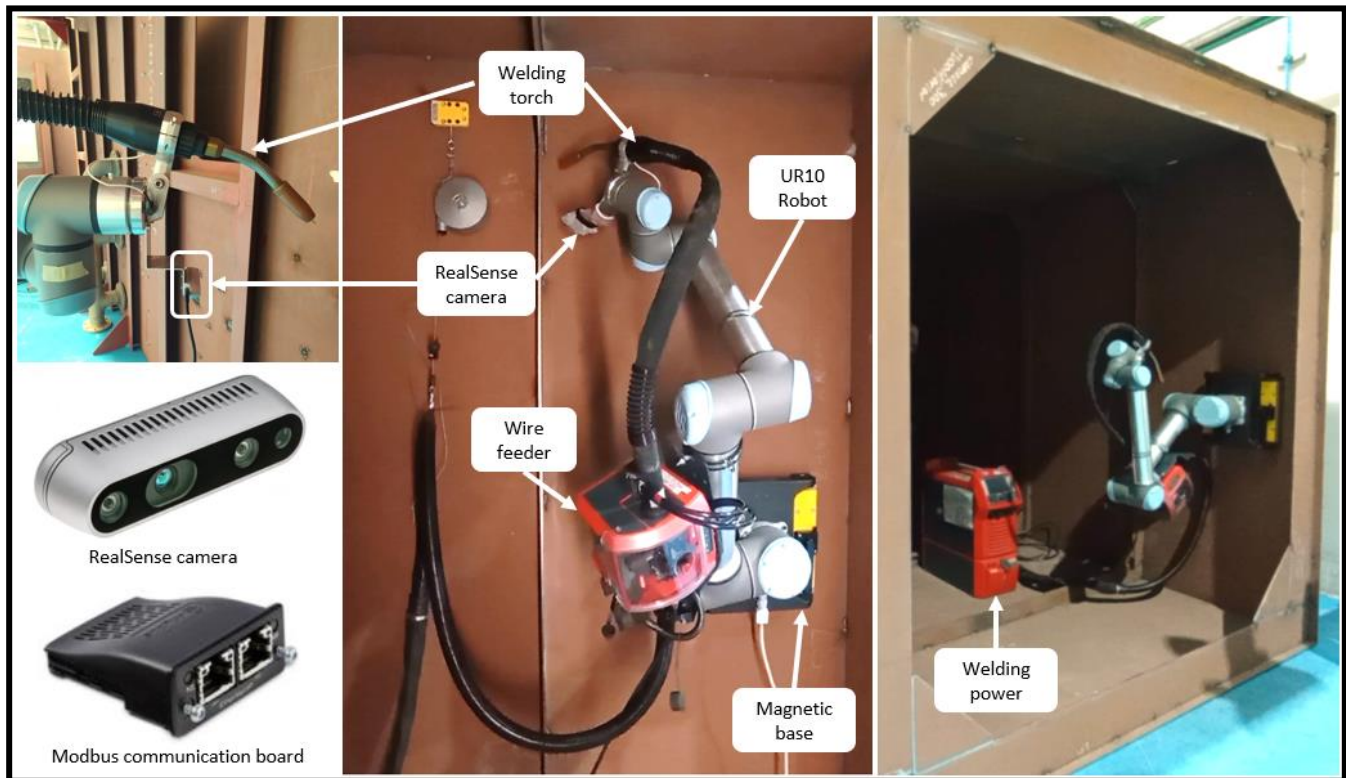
Devices used to perform welding joint inside the vessel block.
